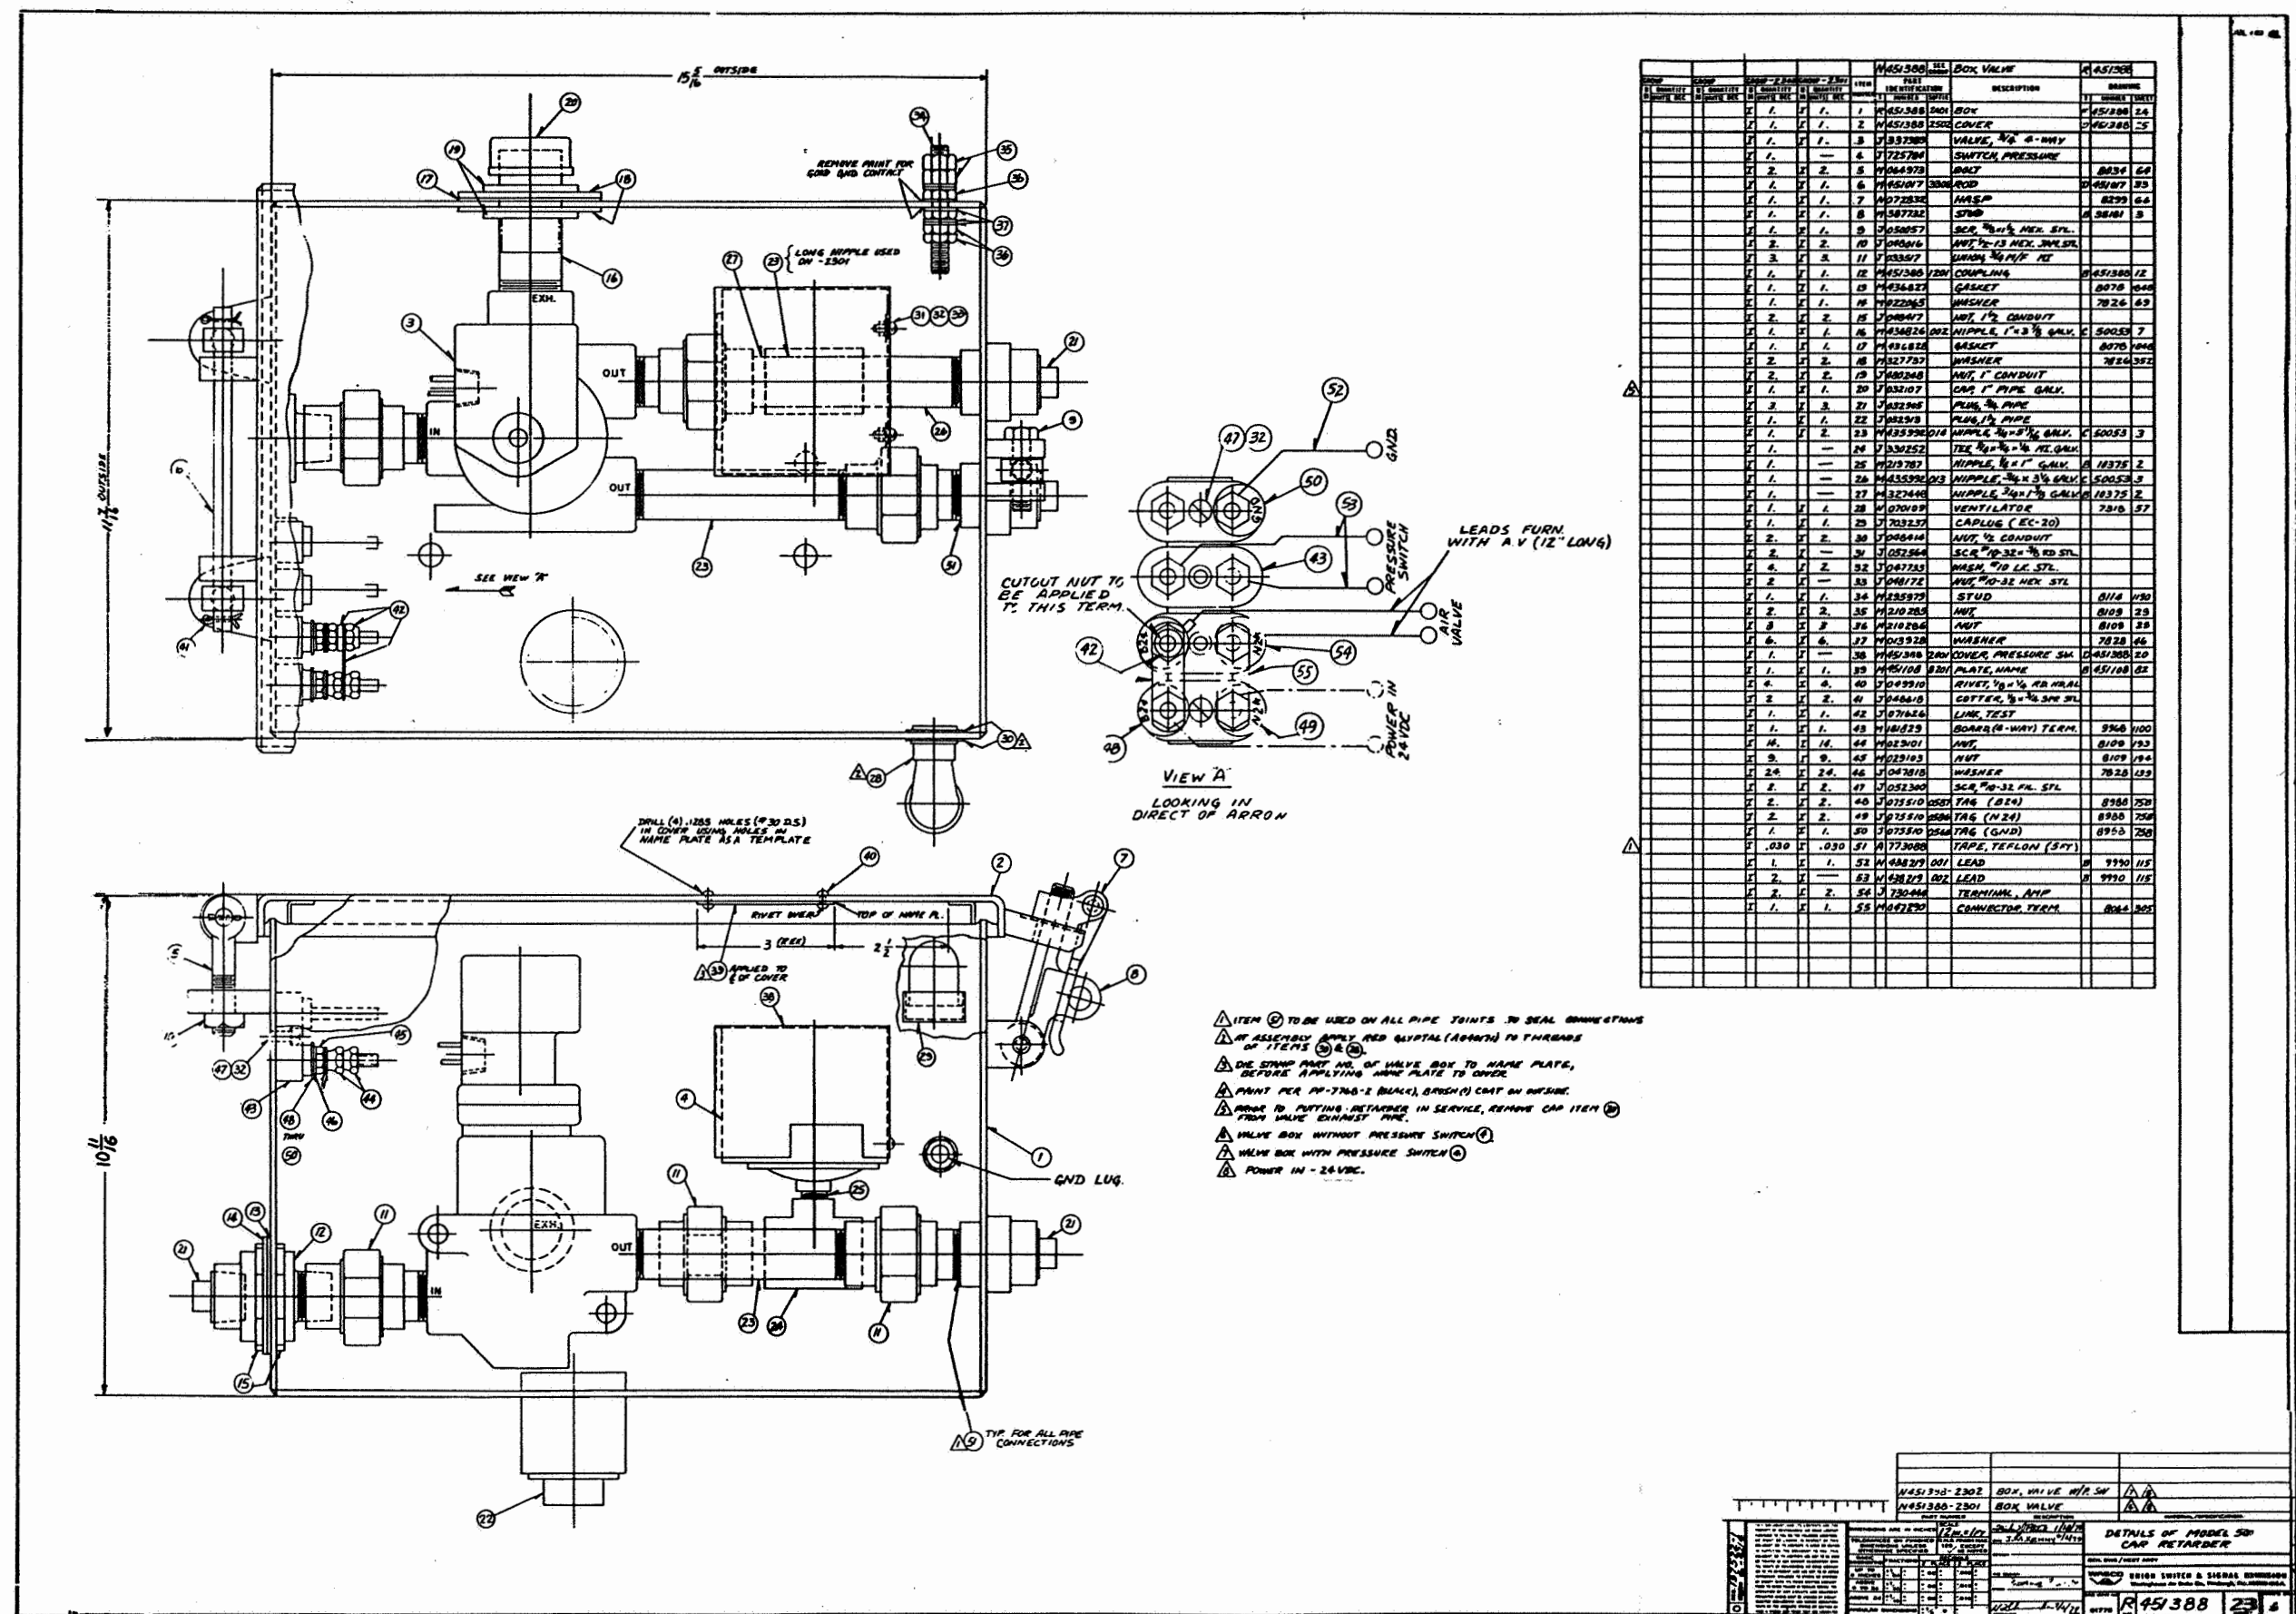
VALVE BOX, LOCATORS AND PARTS LIST
